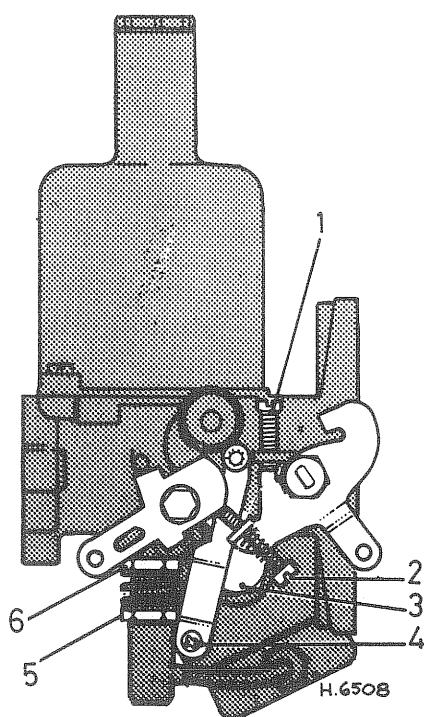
Carburettor adjustment points – SU HS2 (Sec 19)
